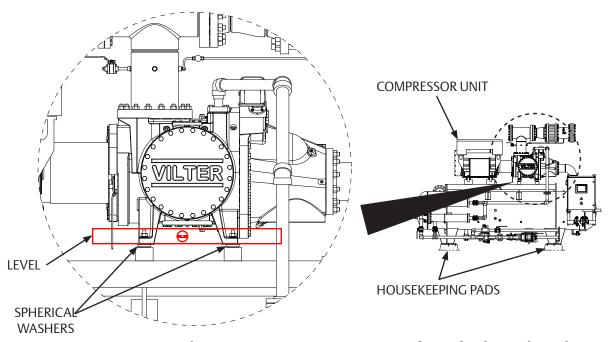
Level Compressor Unit Using Top Surface of Spherical Washers
